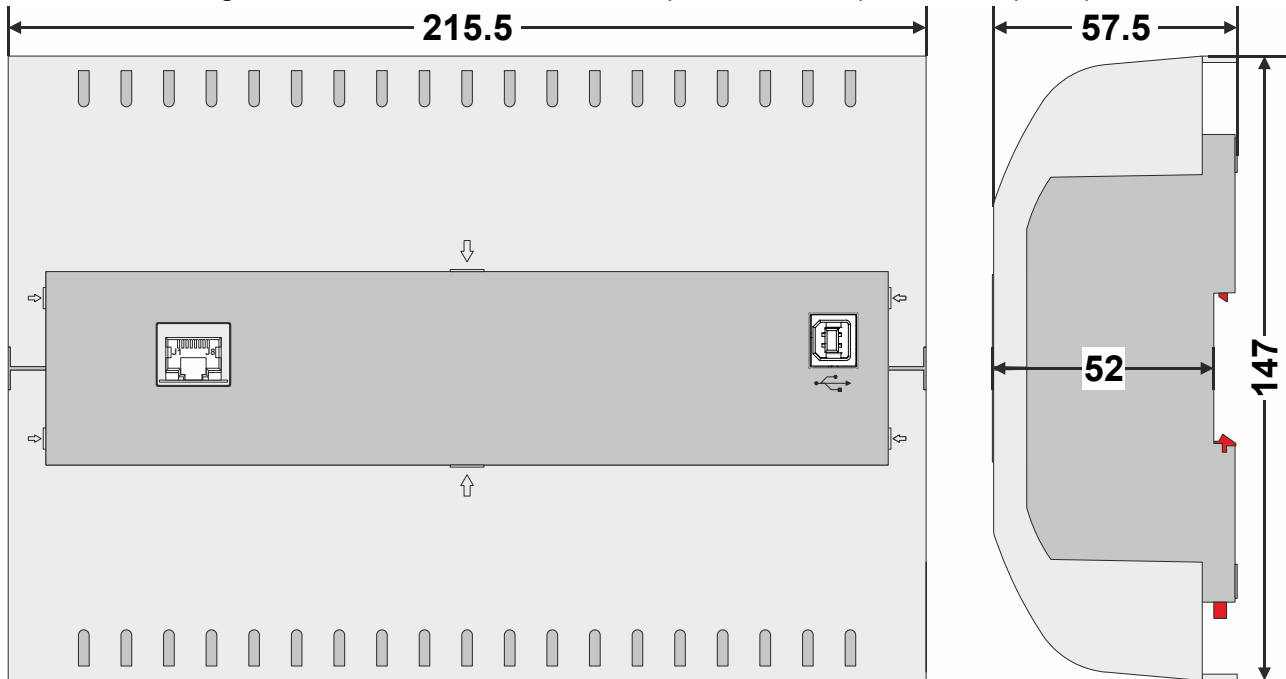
EAGLE Controller with RJ45 socket for CLEAHMI21 External HMI (with MVC-80-AC1), dimensions (in mm)
